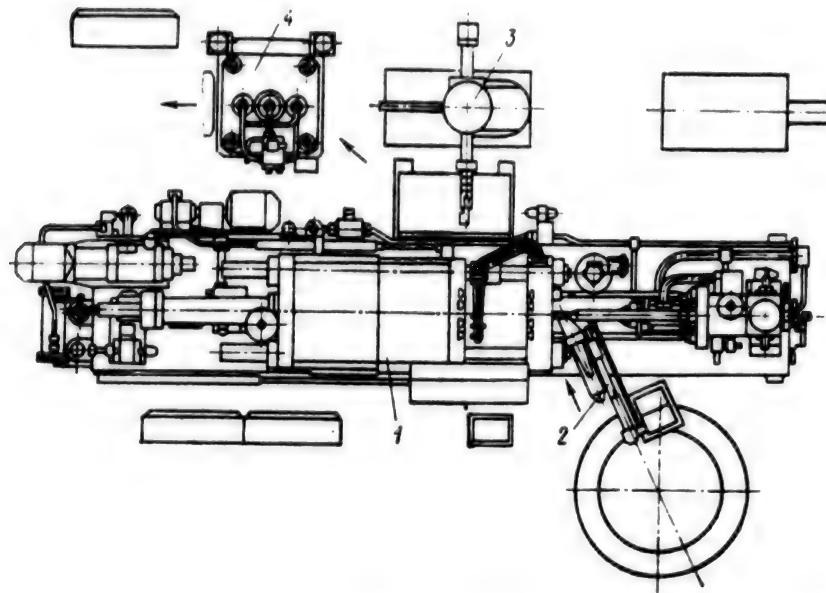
DU711V08 Automated Pressure Die Casting Complex:
